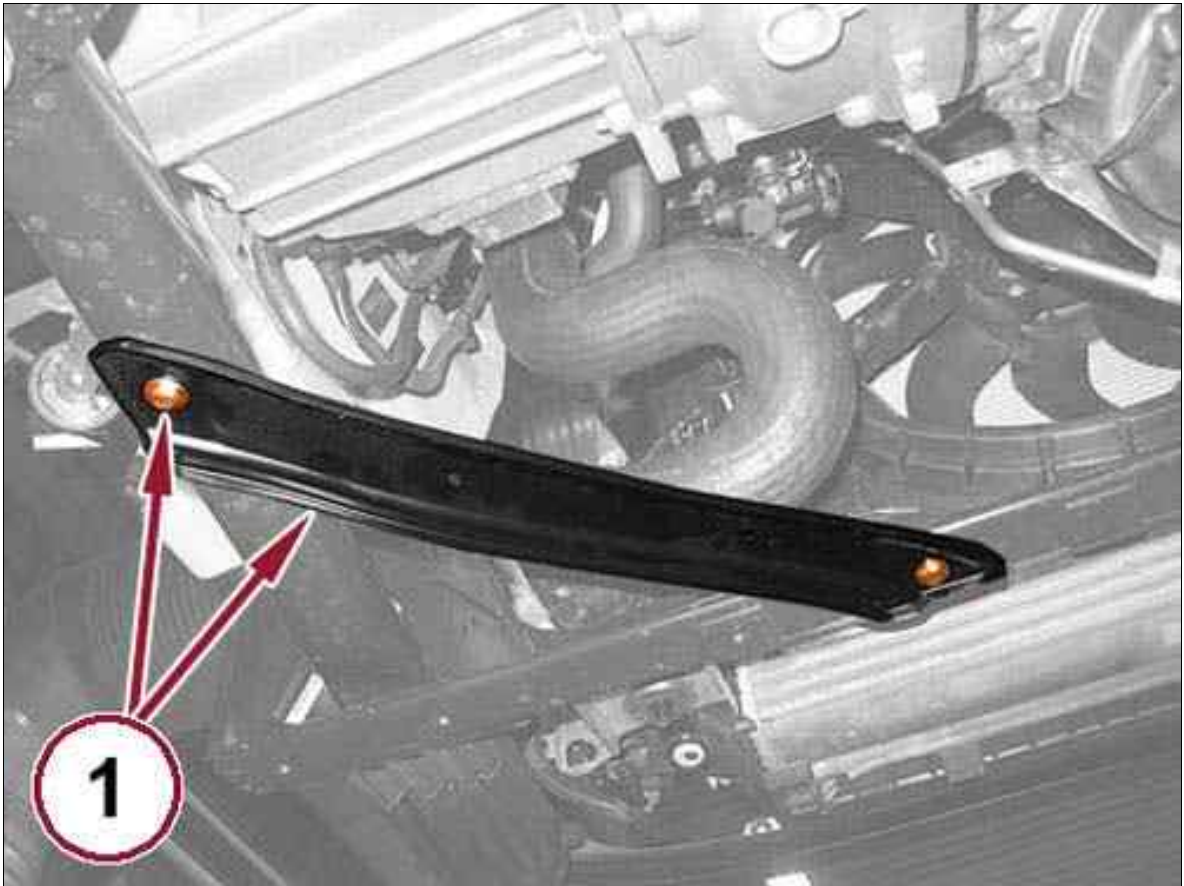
Right And Left Lower Load Beams Fasteners At The Front End
